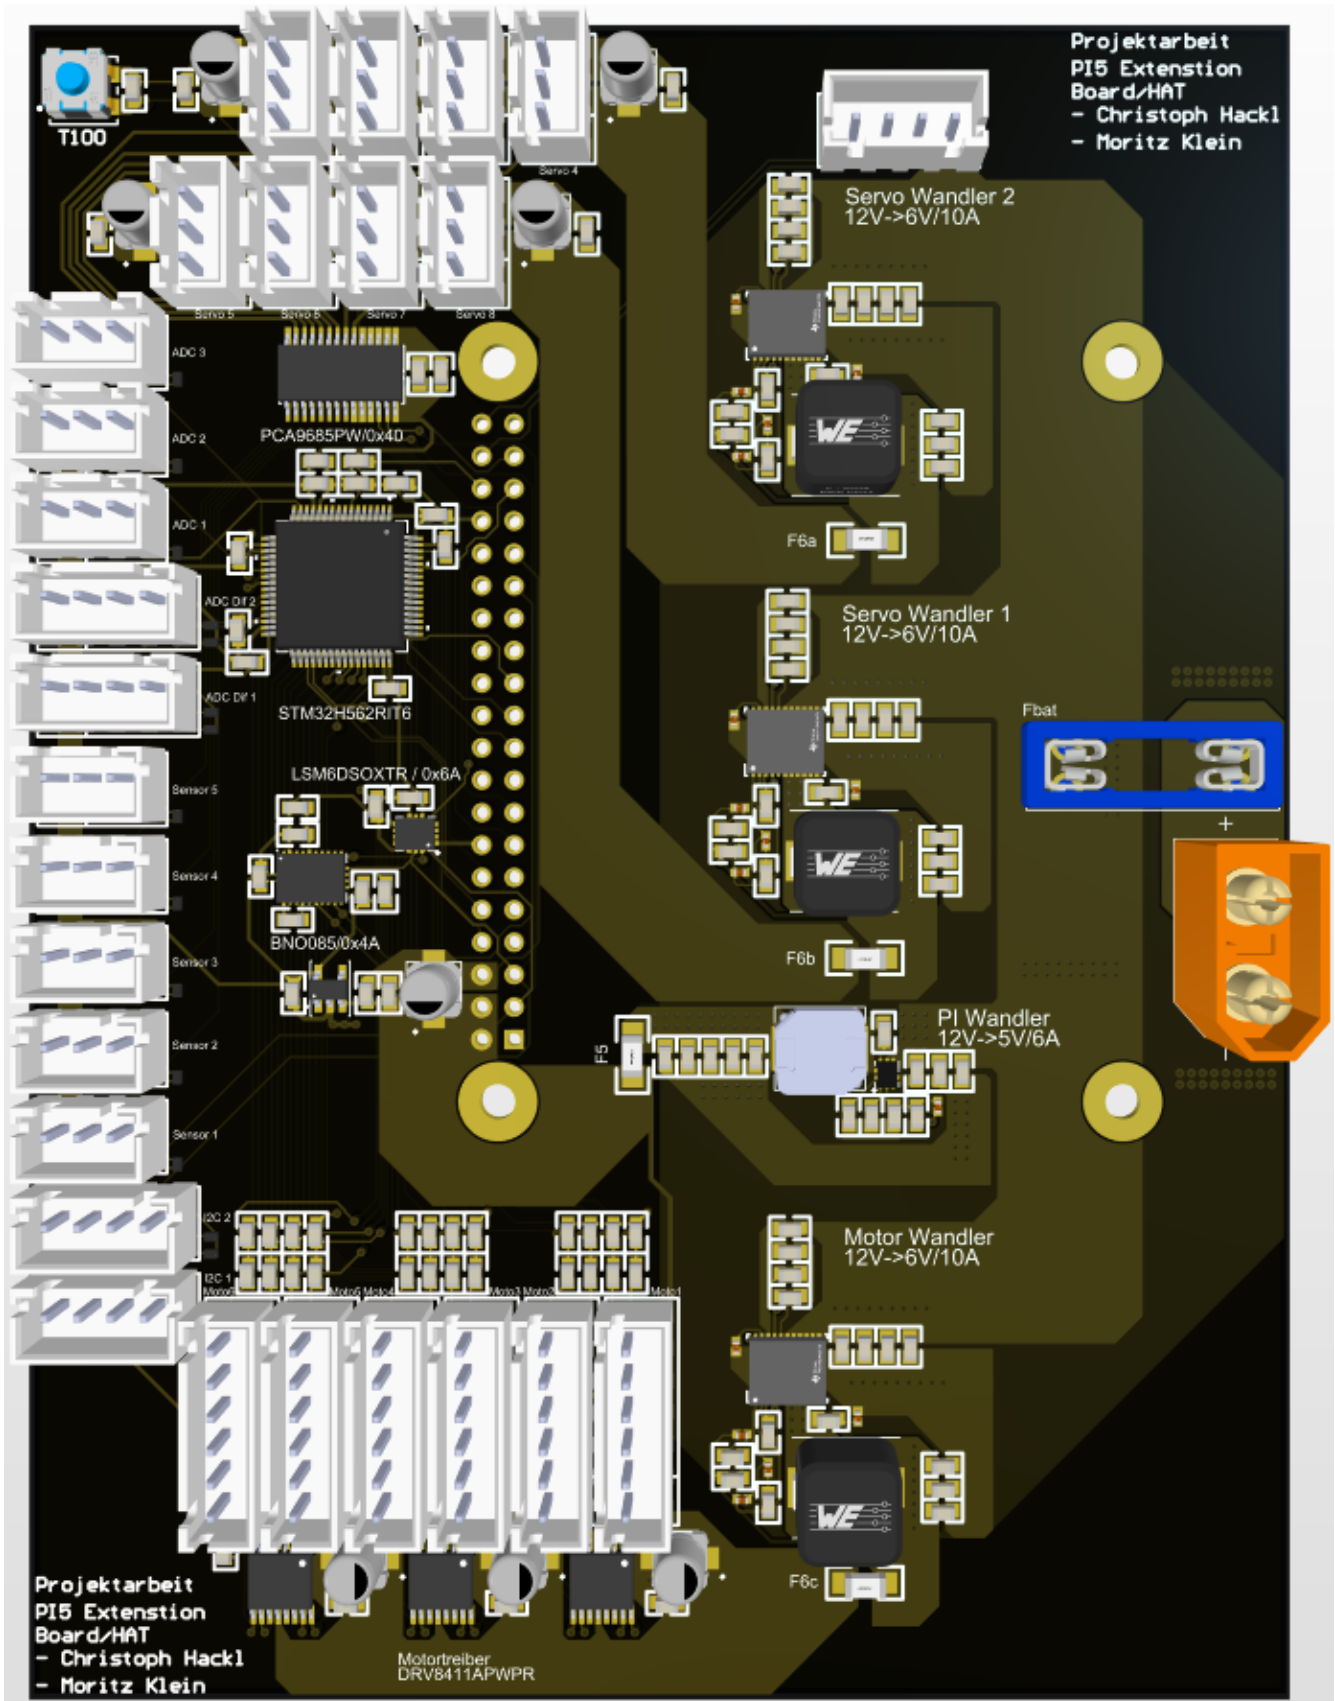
Current PCB layout of the Raspberry Pi robotics extension board prototype.
